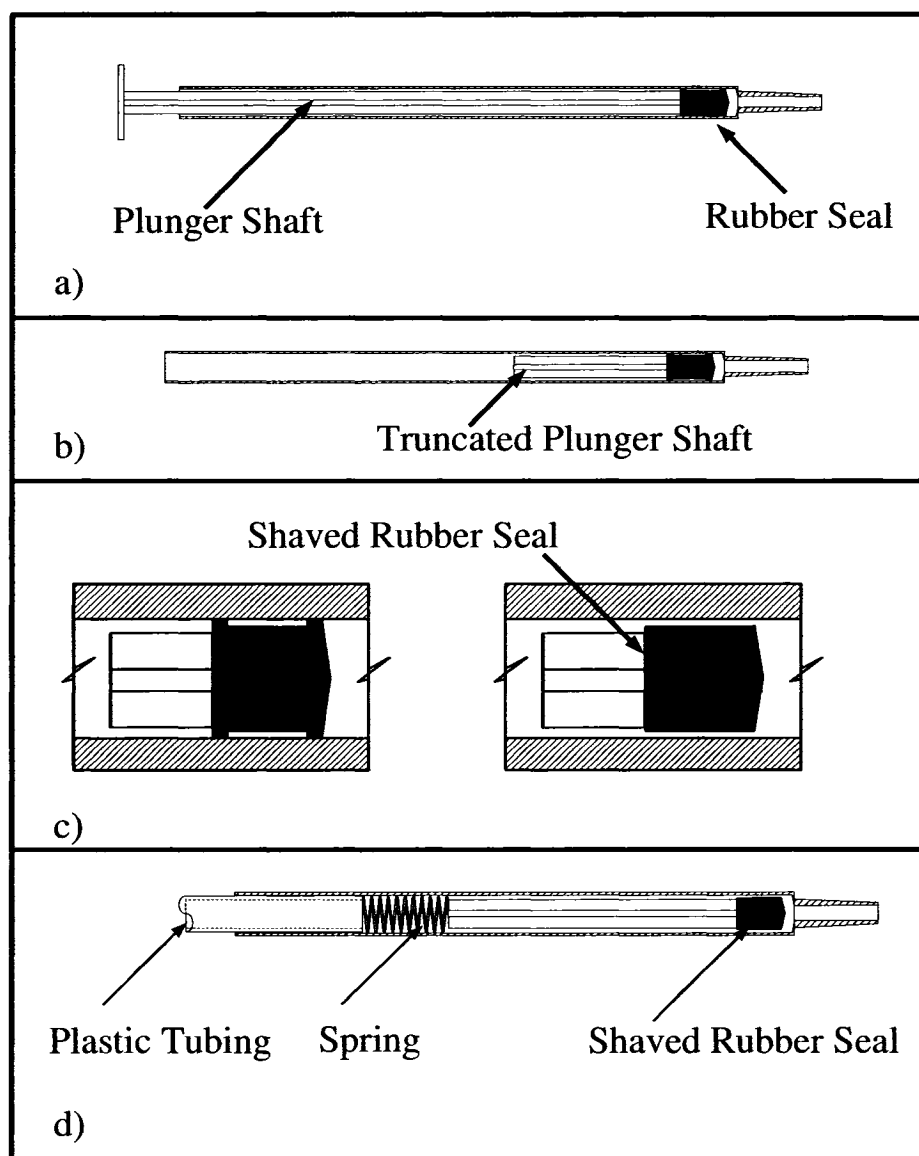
Design of a check valve using a 1 cc syringe and a small spring.
